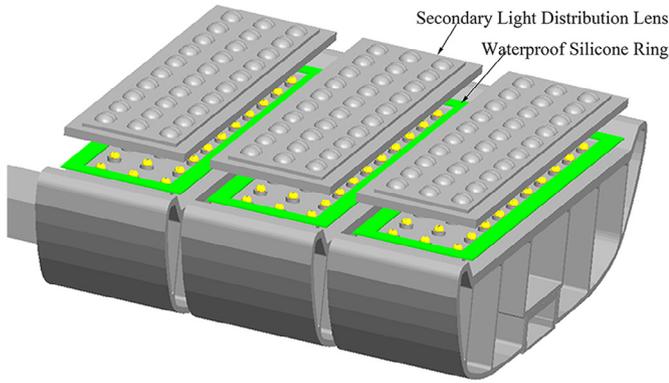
Exploded view of a multiple LEDs lamp (omitting the front and rear end cover).
